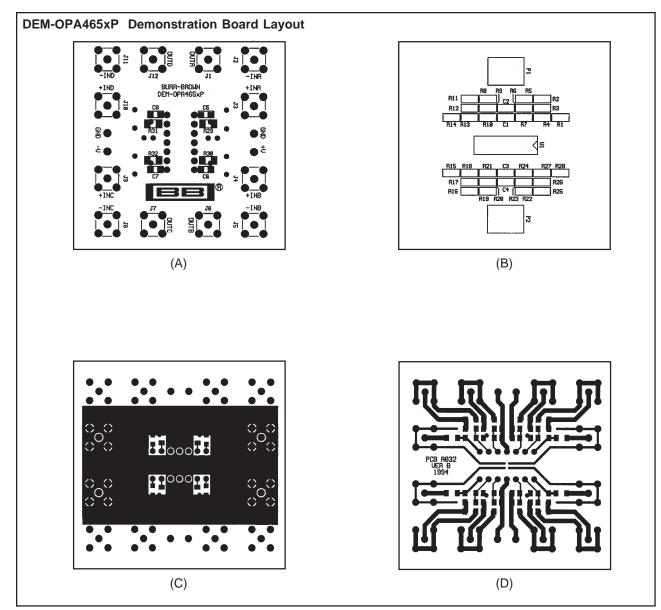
Board Silkscreen (Bottom). 12b. Board Silkscreen (Top). 12c. Board Layout (Solder Side). 12d. Board Layout (Component Side).
